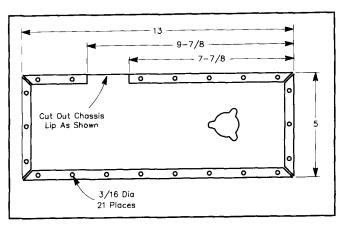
RF plate enclosure. Install blind fasteners in the 21 3/16-diam. holes.
